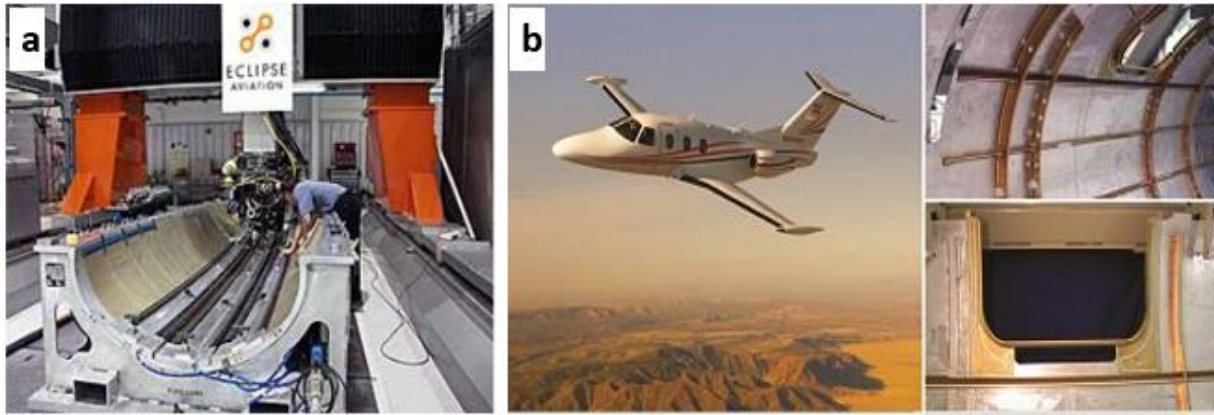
Application of friction stir welding in Aircrafts. (a) FSW gantry at Eclipse Aviation for welding aircraft stringers and spars to aluminium cabin panels [24]. (b) Eclipse jet with circumferential aluminum fuselage stiffeners and door doublers joined using FSW (obtained from <https://insights.globalspec.com/article/12966/applications-of-friction-stir-welding>) [16]
